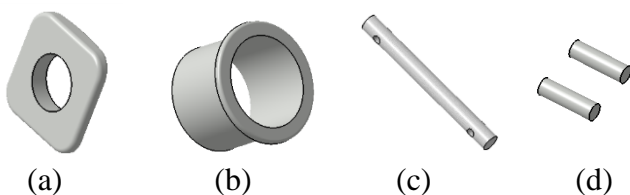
CAD models: (a) Planetary gear bush, (b) Sun gear bush, (c) Main pin & (d) Small restricting pins
